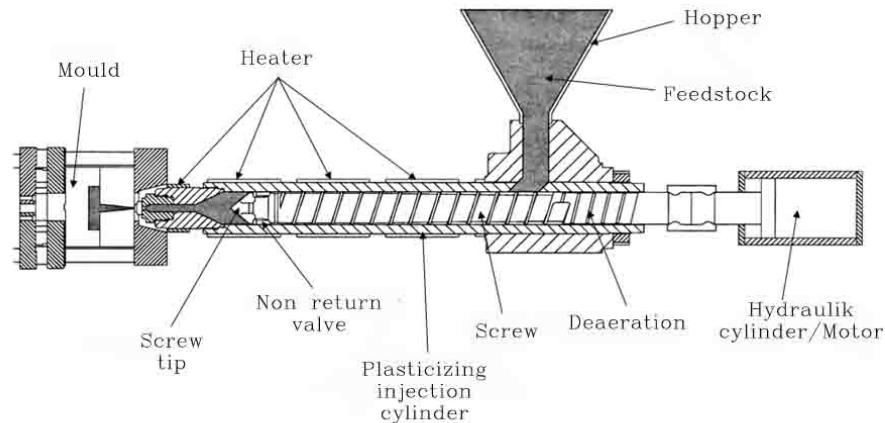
A sketch of the basic metal injection moulding operation.
